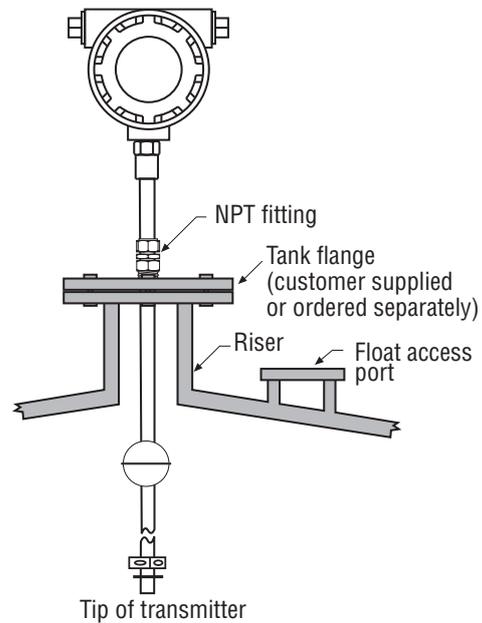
Threaded flange mounting for rigid (shown) and flexible pipe
